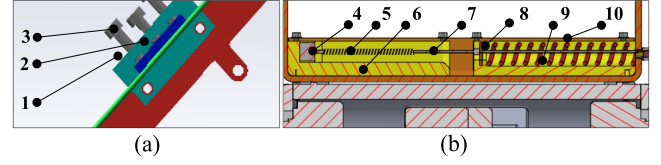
Detailed views of the assemblies “I” and “II” in Fig. 3. (a) Partial view of the spring engaging mechanism (e.g., the one attached to the calf joint), and (b) sectional view of the spring pretension/guide mechanism. Here, 1-spring engaging flange, 2-compression board, 3-compression bolt, 4-connection block, 5-pretensioned soft spring, 6-guide slot, 7-Bowden cable, 8-clamp, 9-parallel tension spring, 10-sealing cover.
